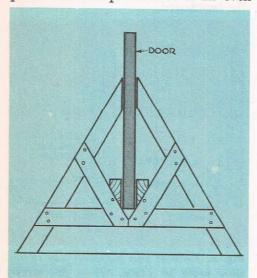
A simple jig of this type will make it easy to hold a door on edge for fitting and planing.
